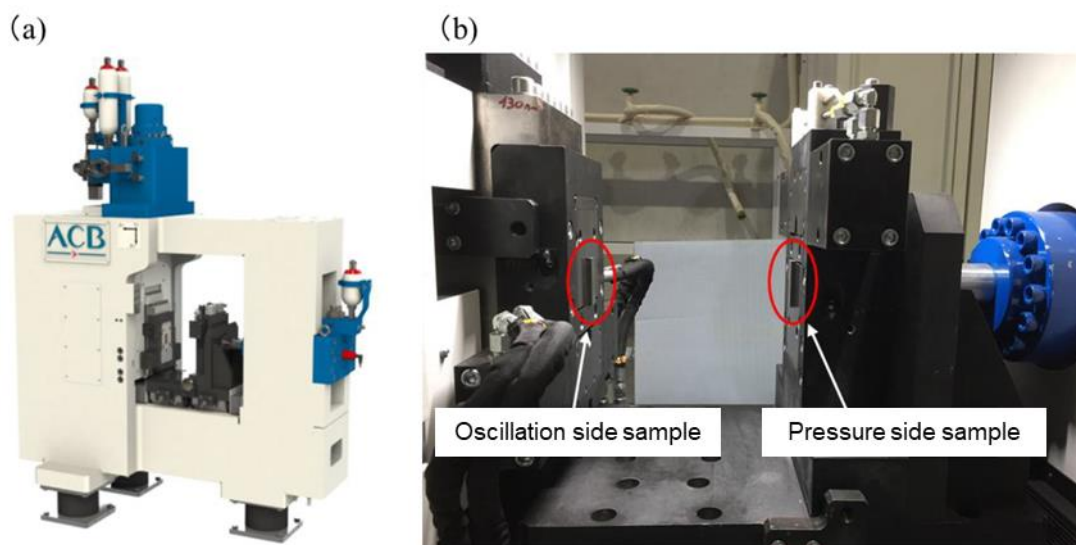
Photographs of (a) the entire linear friction welding equipment and (b) the working part used in this study.
